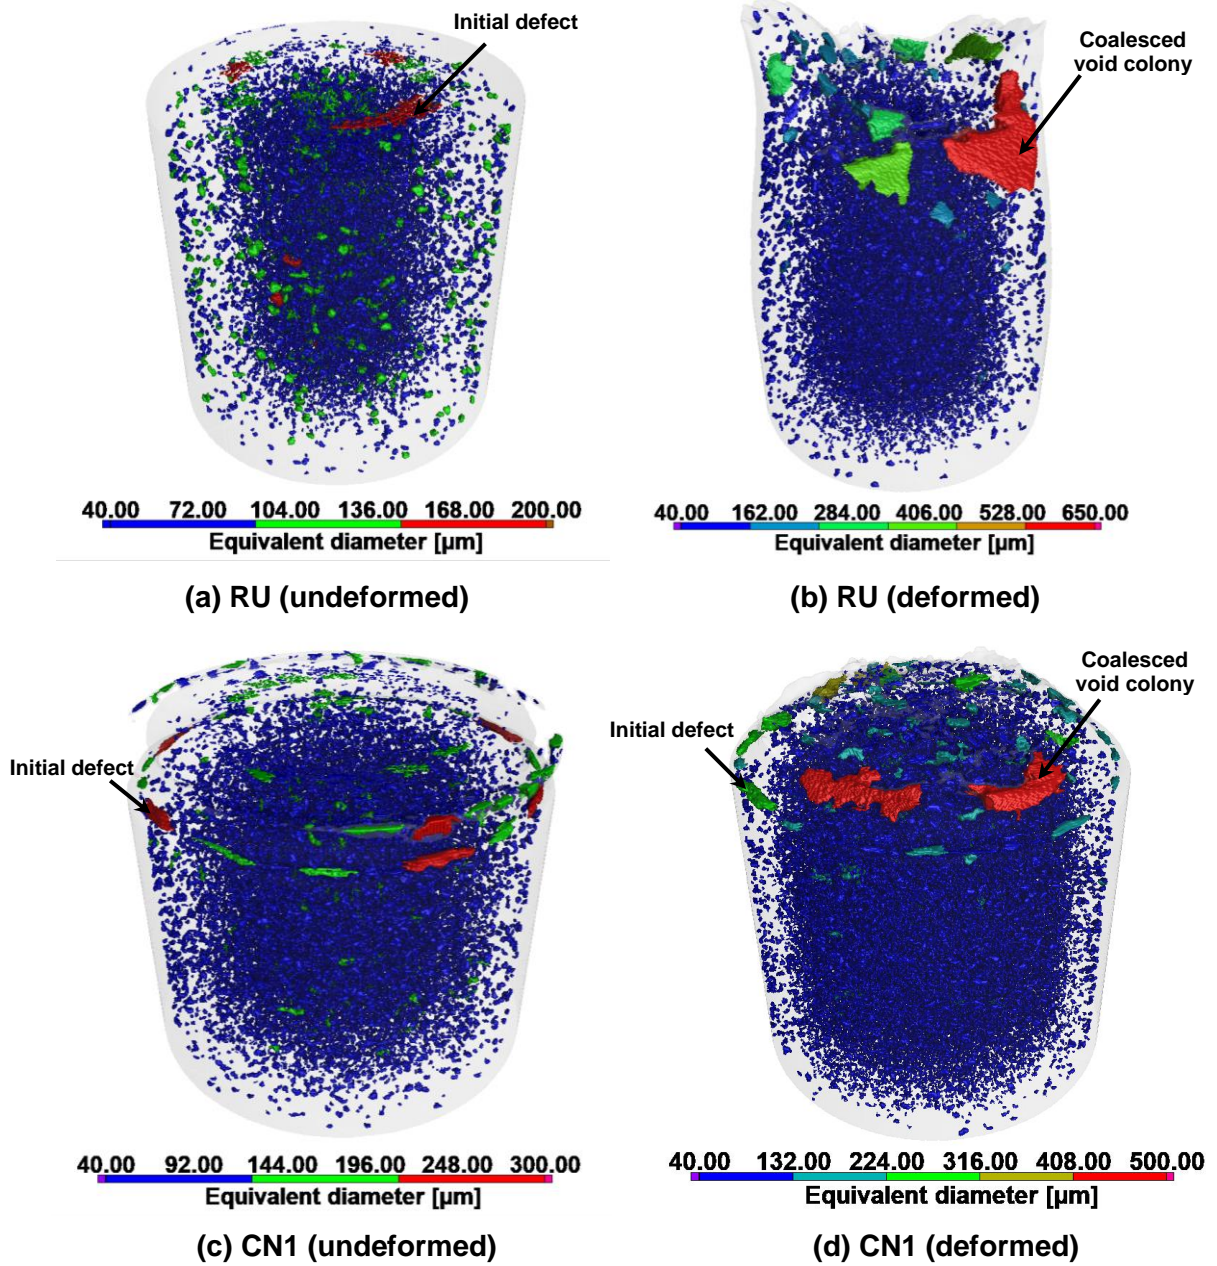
Defects in zone A before and after fracture for specimens (a,b) RU and (c,d) CN1.
